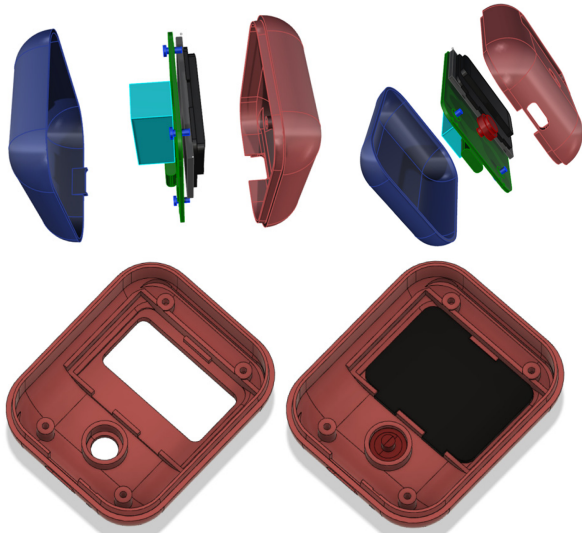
Assembly Diagram of Manufactured Sensor Mechanism.
